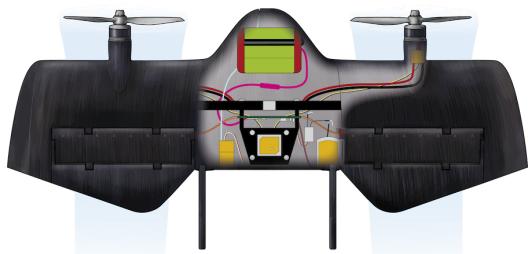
Fuselage and wingtip parts manufactured by *Onyx* material with MarkForged Mark-Two machine.
